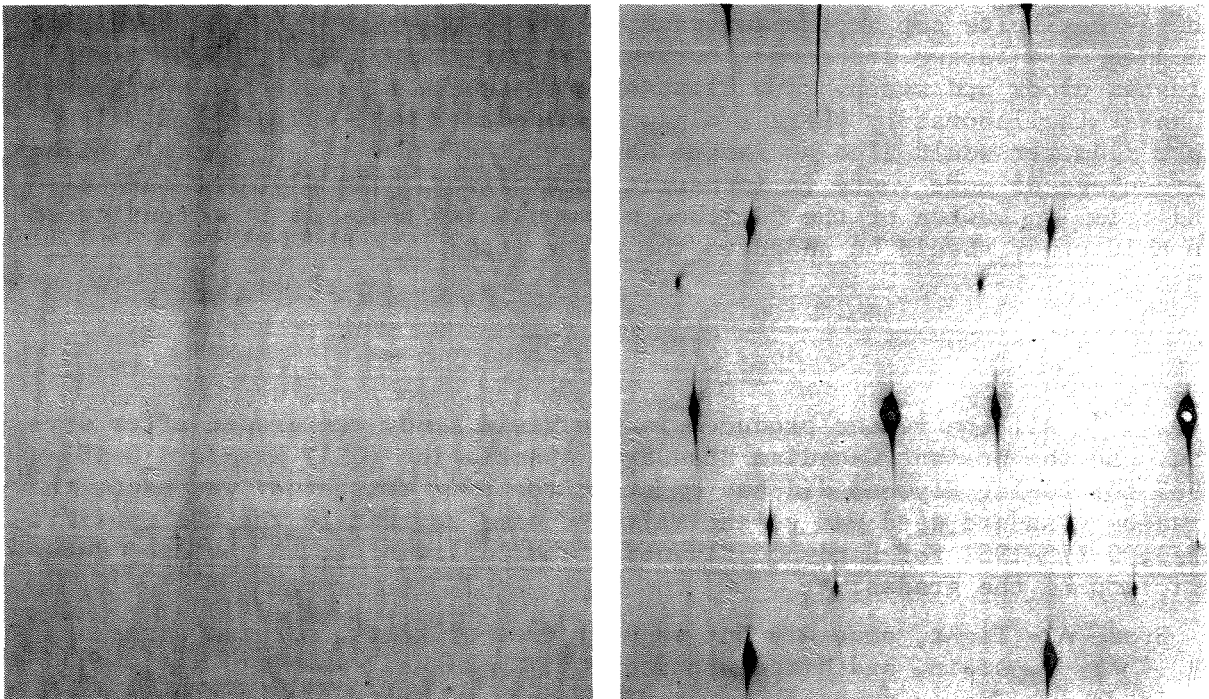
Typical trembling aspen plywood panels 40 by 30 inches showing various qualities of face veneers. Left panel shows no defects, and right panel shows full knots, open knots, pin knots, and stain streak.
